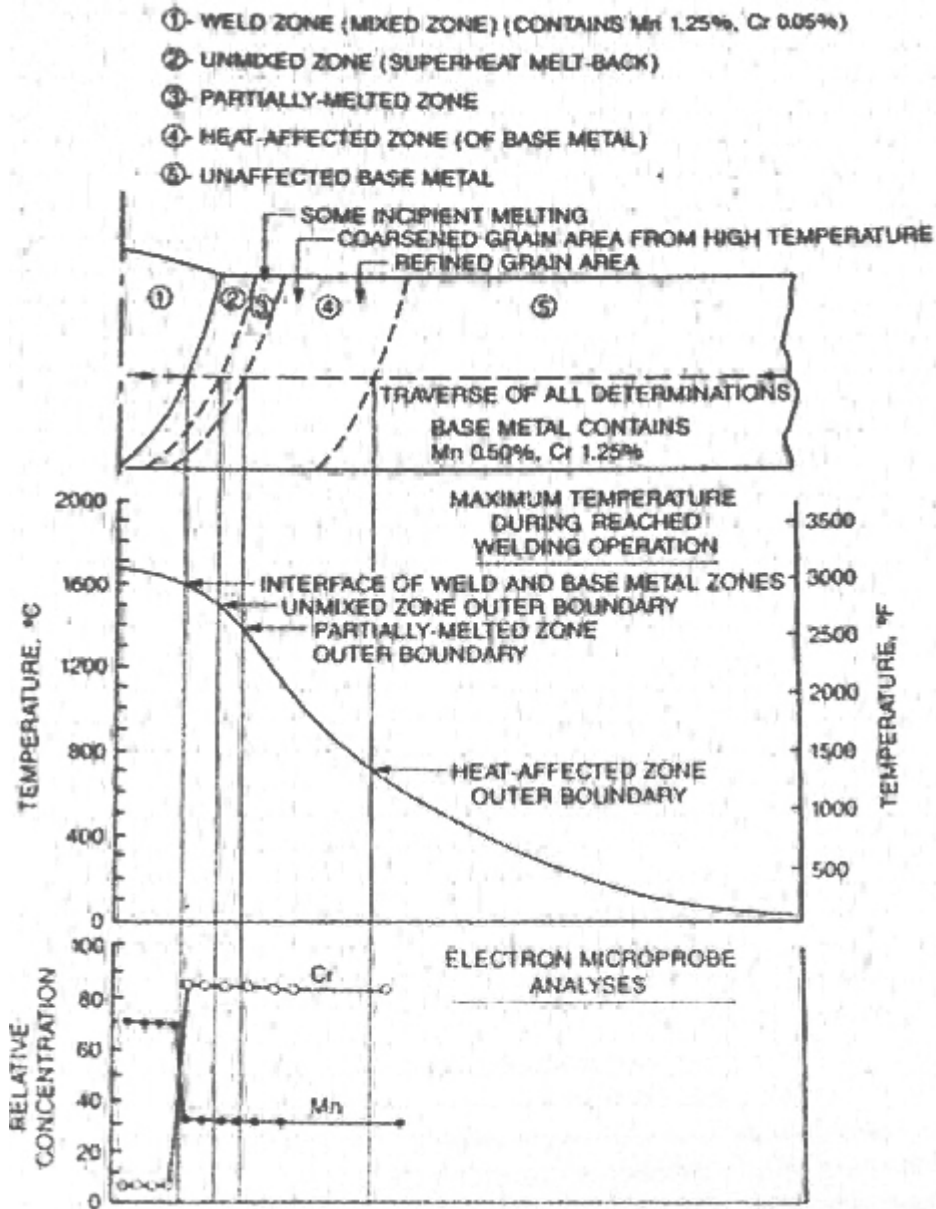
Distinct zones found in fusion welds [22]
